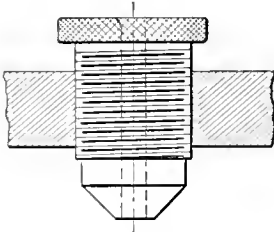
Screw Bushing used for Locating Work Central with a Hole.
